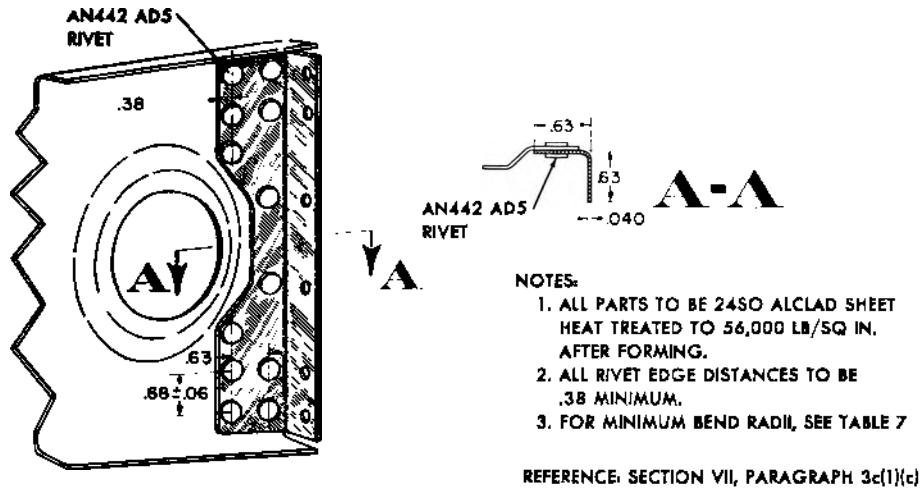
RUDDER—METHOD OF SHORTENING RIB
